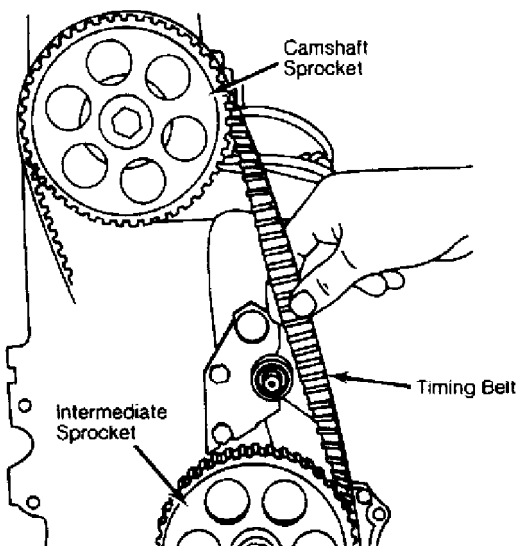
Checking 1.8L Timing Belt Tension (8-Valve)
